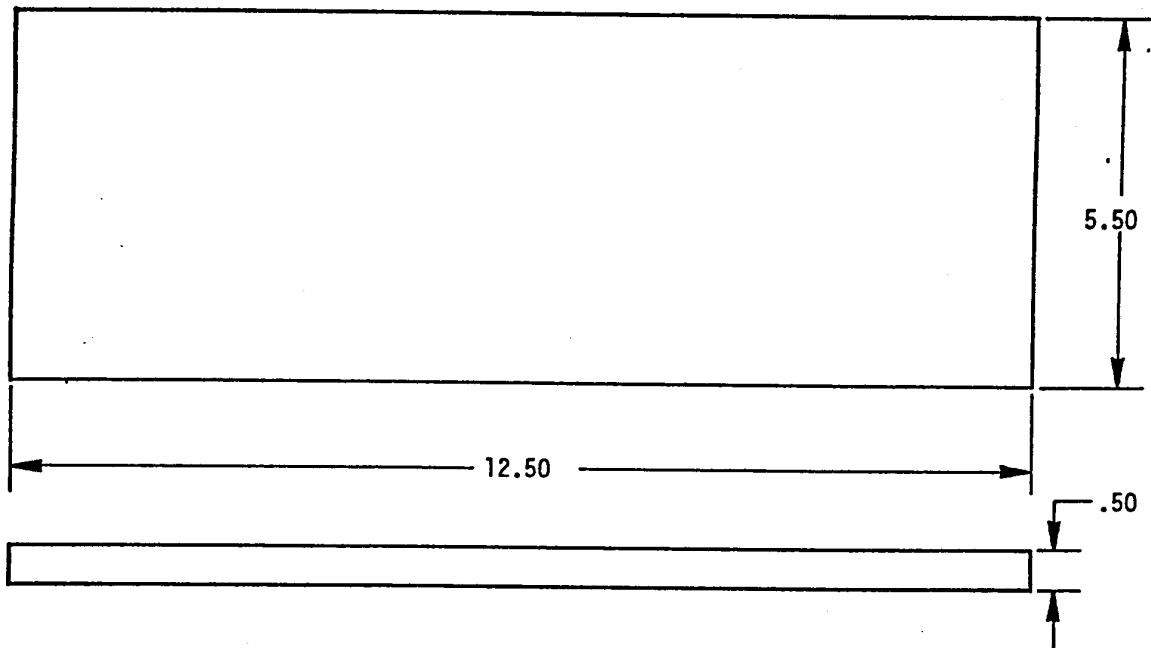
Installation, shipping 120MM gun tube - Continued.
